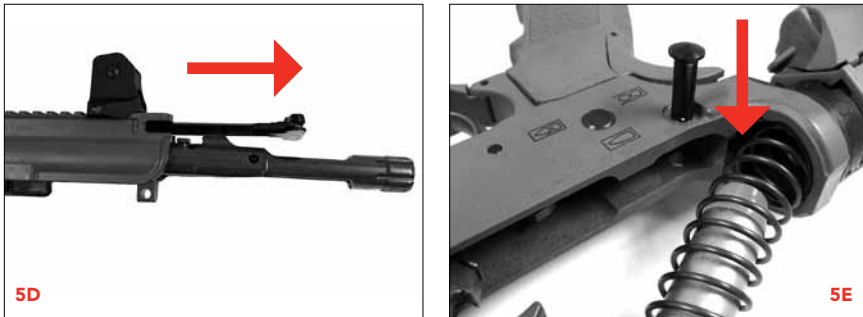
D (left) Pull charging Handle out and remove Bolt Carrier.
